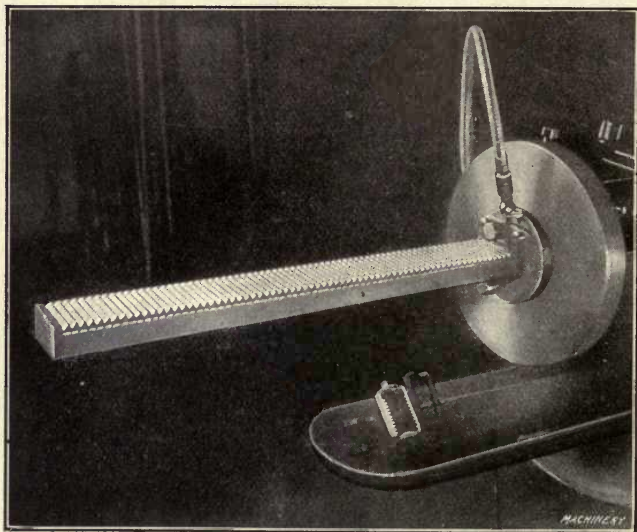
Broach for Finishing Drop-forging shown in Fig. 14
